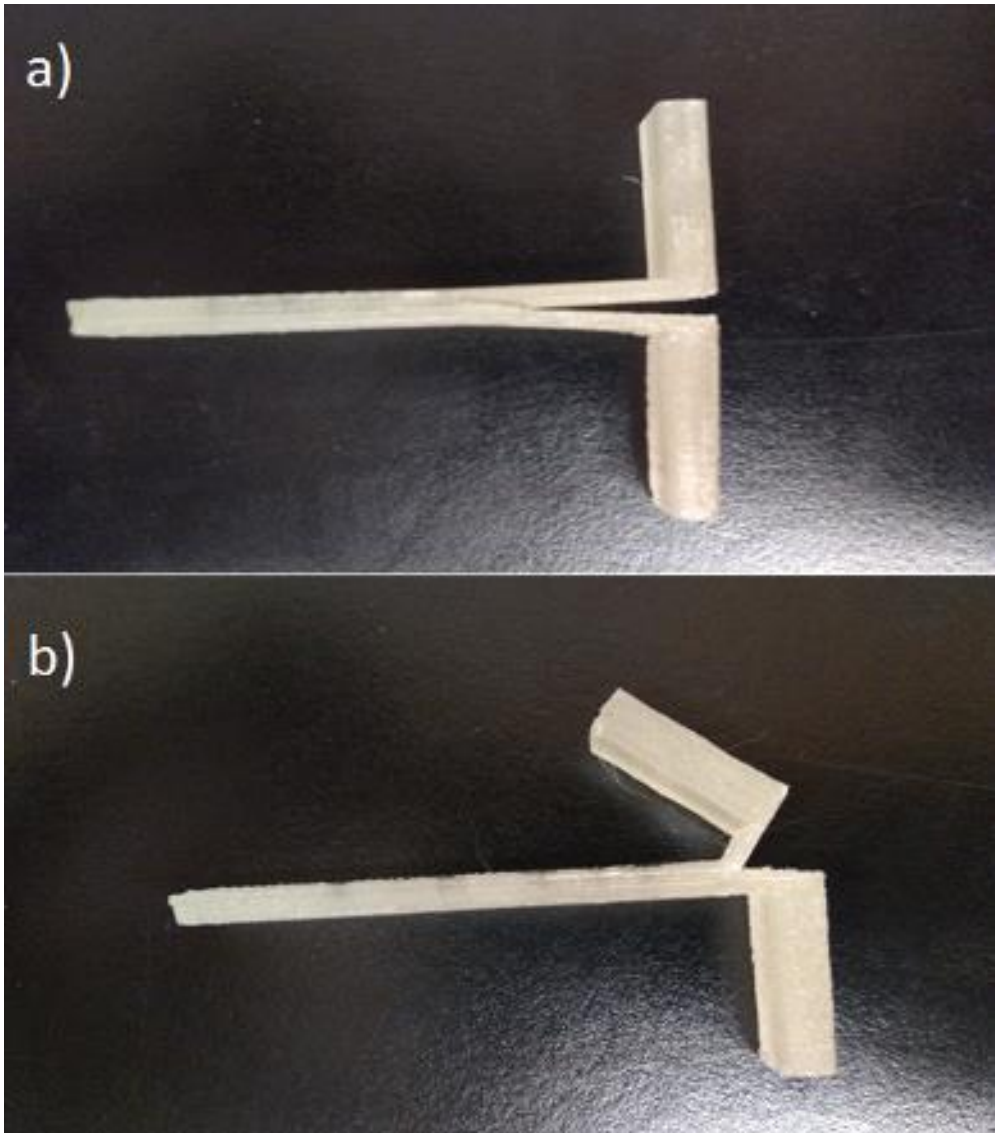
(a) Fractured neat T-peel specimen and (b) Fractured 10 mol% 50k LMW PLA T-peel sample
